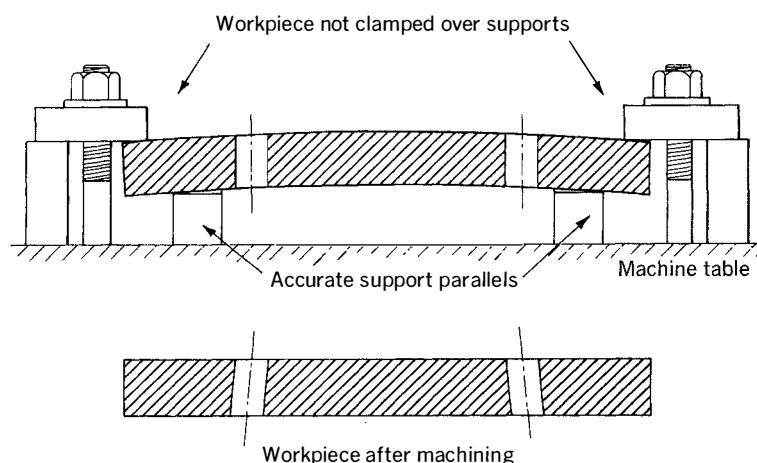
Inspection of workpiece using the Measuring Machine reveals that the holes are out-of-parallel, traceable to faulty clamping procedure in the machining operation.
